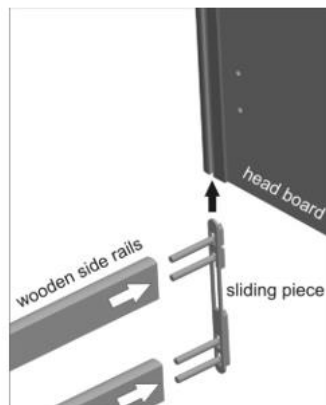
Insertion of wooden side rails & glide piece into head/foot board
